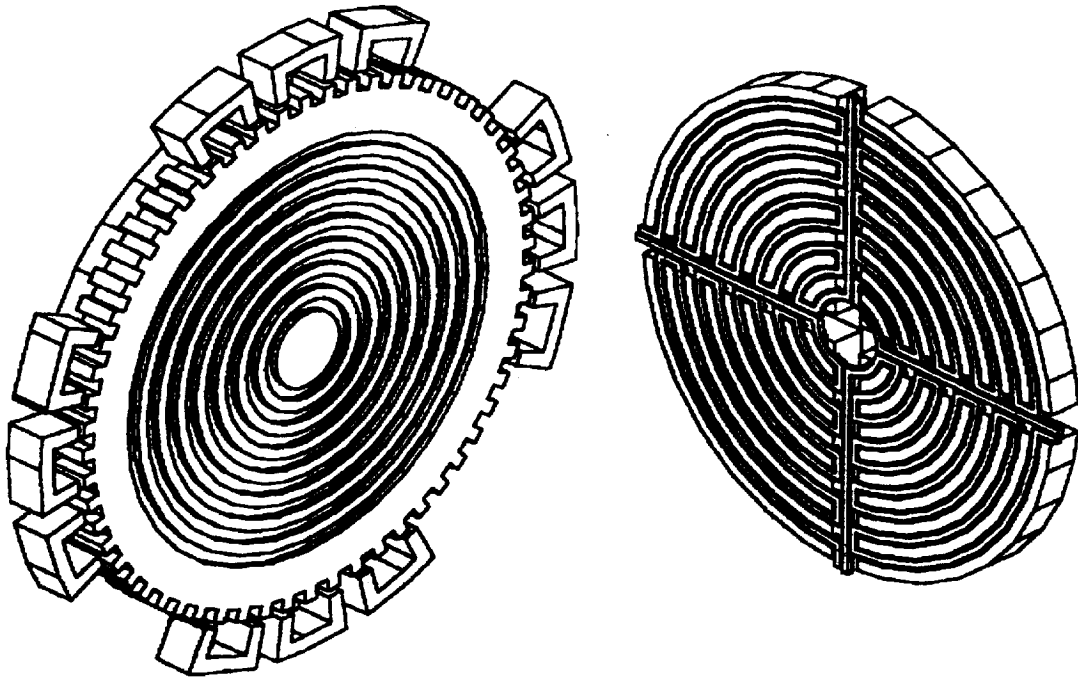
Magnetically suspended wheel and actuator configuration, exploded.
